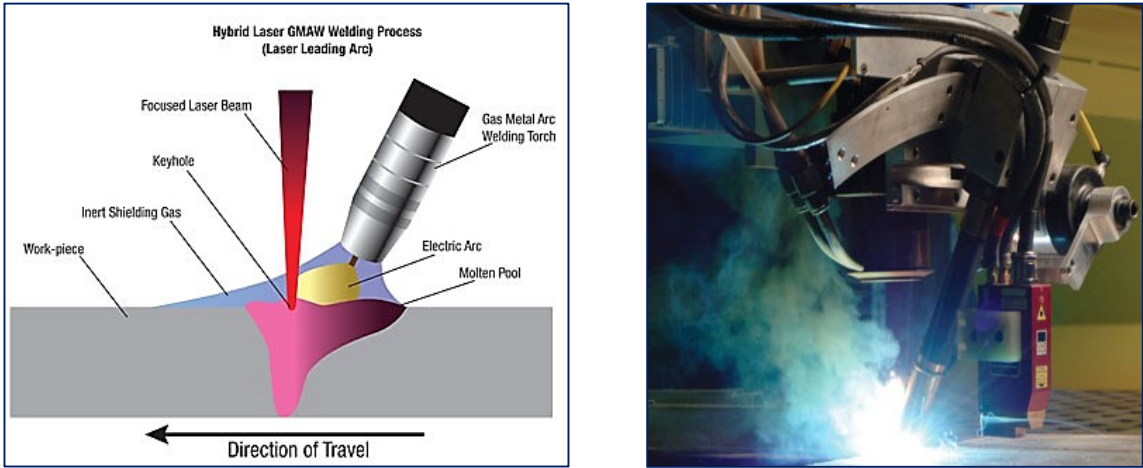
Laser Hybrid Welding Process [29] [41]
